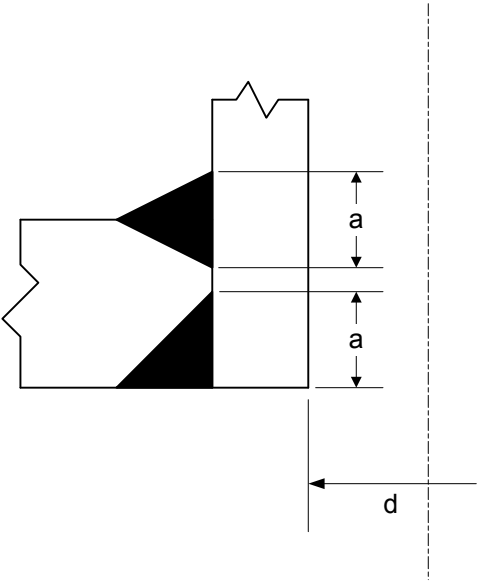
Dimensions “a” and “d” For A Partial Penetration Corner Weld
